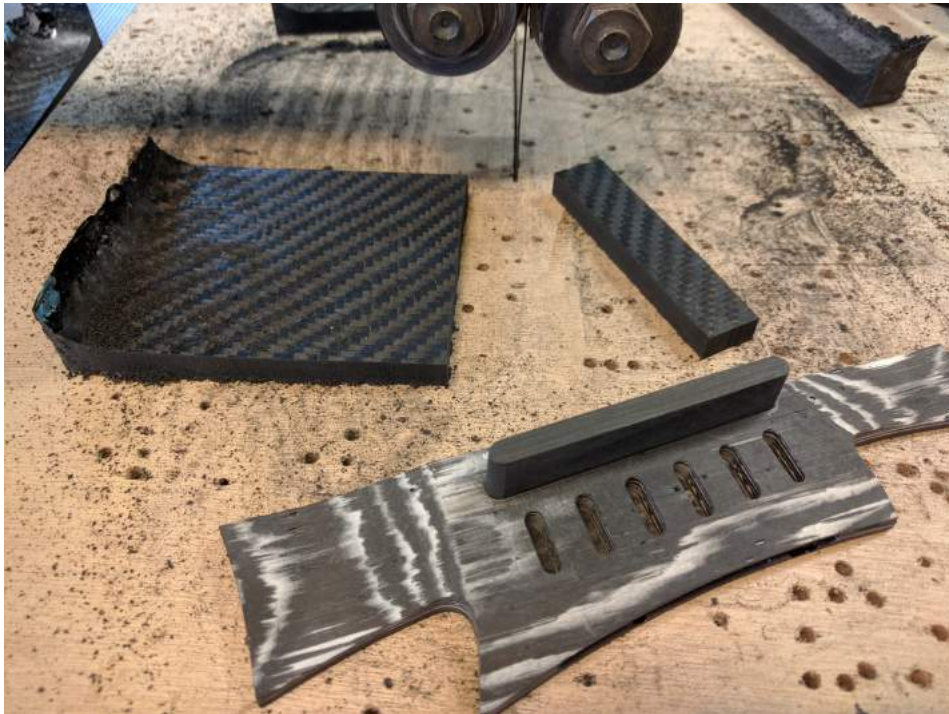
Sawing of the carbon fibre epoxy blank to obtain nut and saddle pieces.
